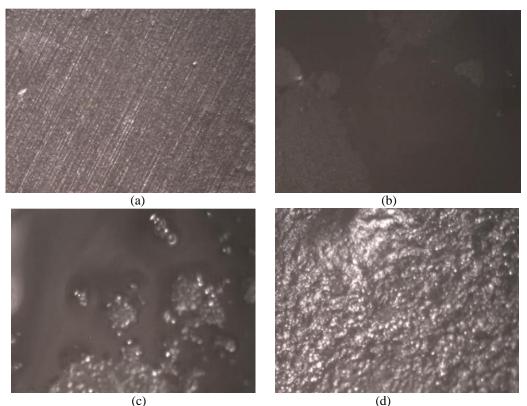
The change of surface appearance of a cladded sheet during a brazing cycle: (a) before clad melting; (b) molten filler metal surface; (c) onset of filler metal solidification; (d) rough surface after filler metal solidification.
